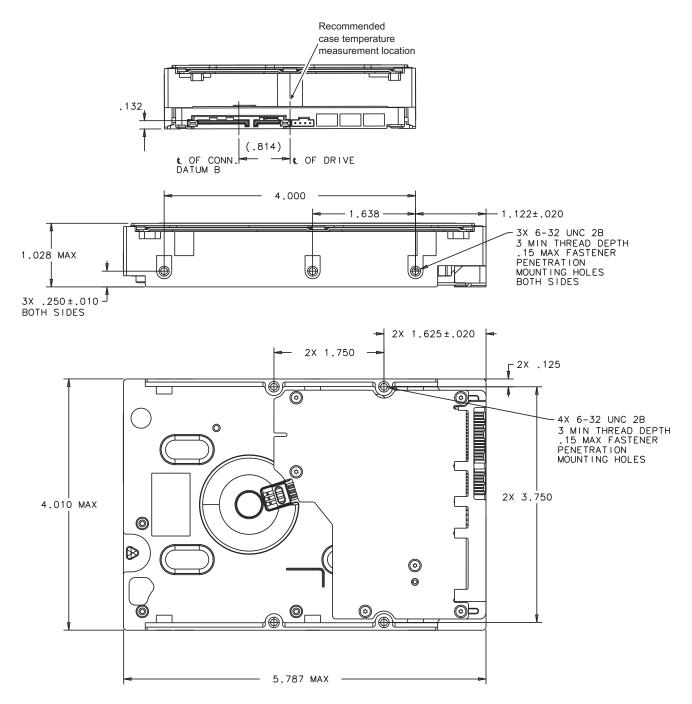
Mounting dimensions (2.0, 1.5 and 1.0 TB models)
